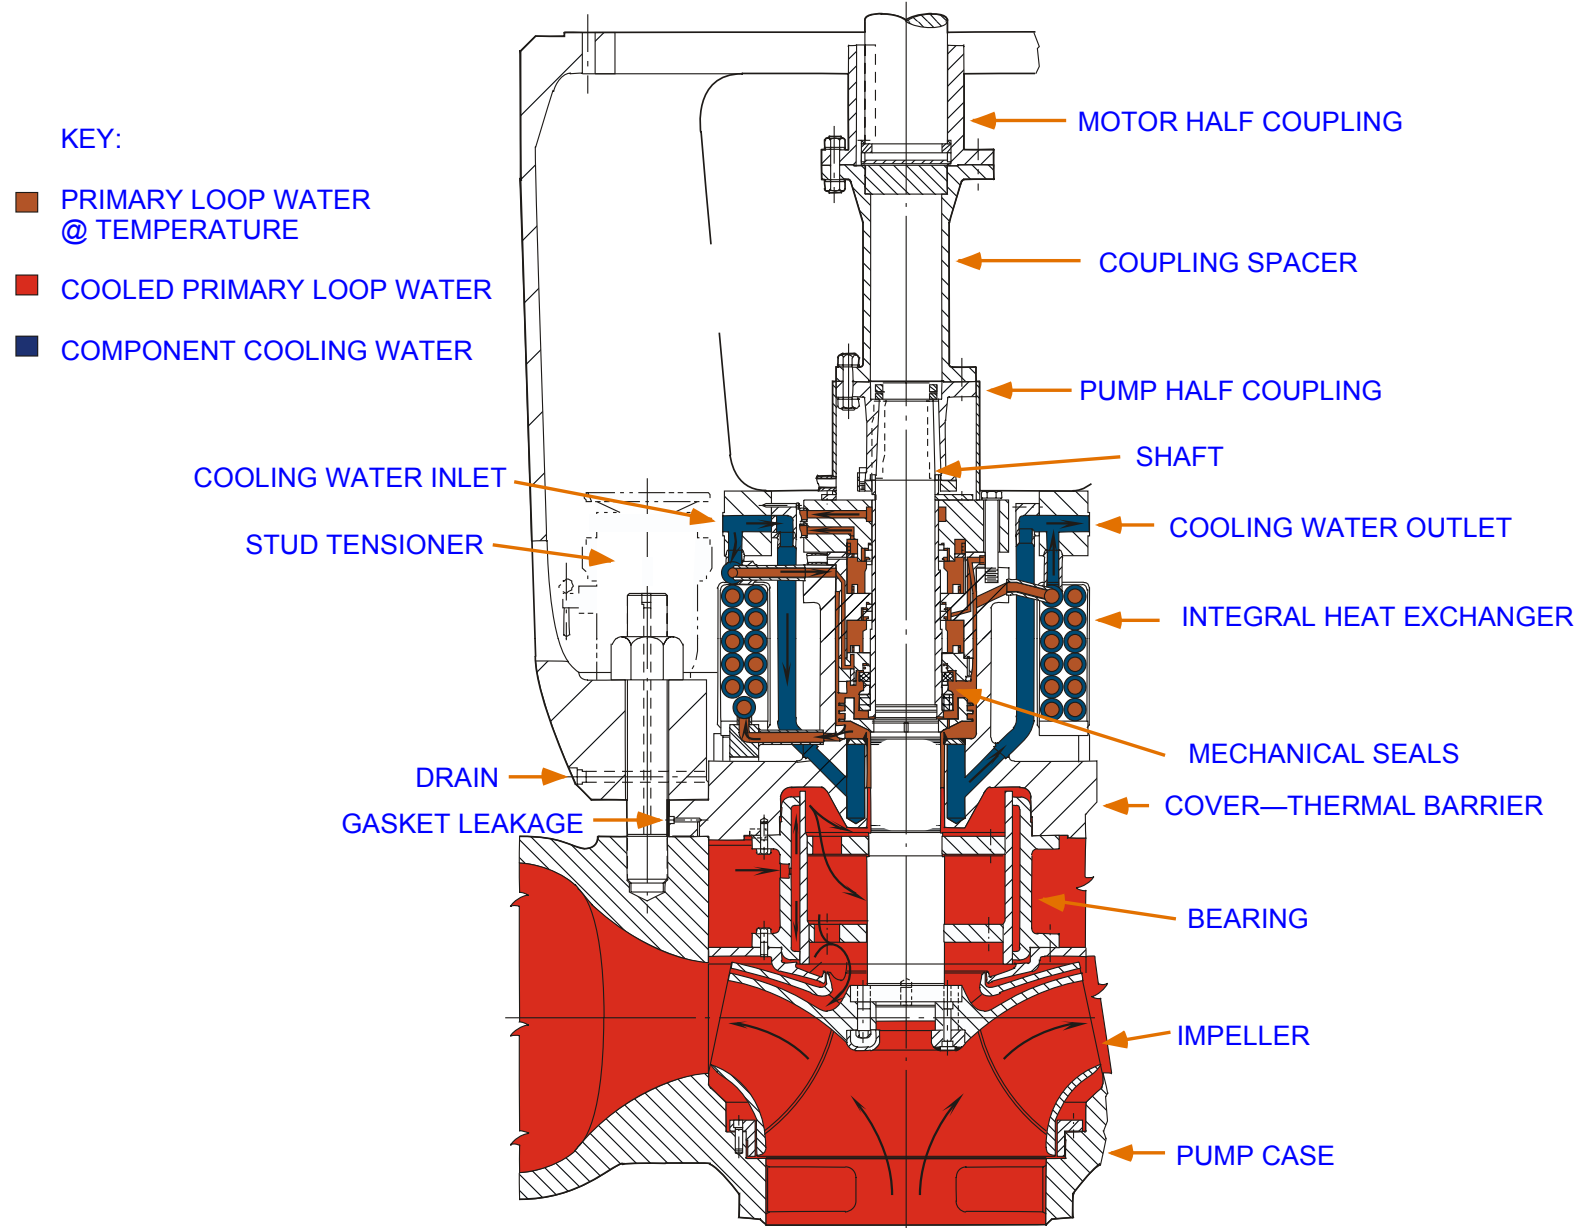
Reactor Coolant Pump Seal Assembly
